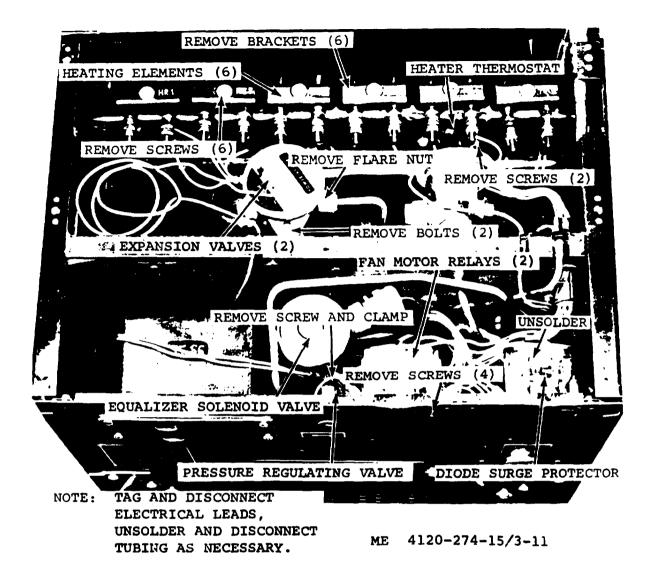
Models CV-9-3-08-60 and CV-9-3-08-400, heating element, expansion valve, fan motor relay, equalizer solenoid valve, pressure regulating valve diode surge protector, removal and installation
